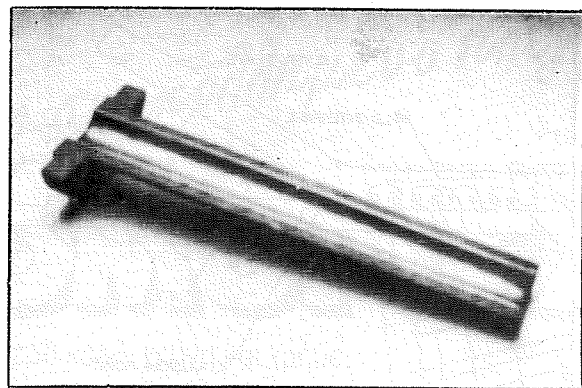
Long-Weld-Neck flange clad with 3mm of nickel alloy 400.
